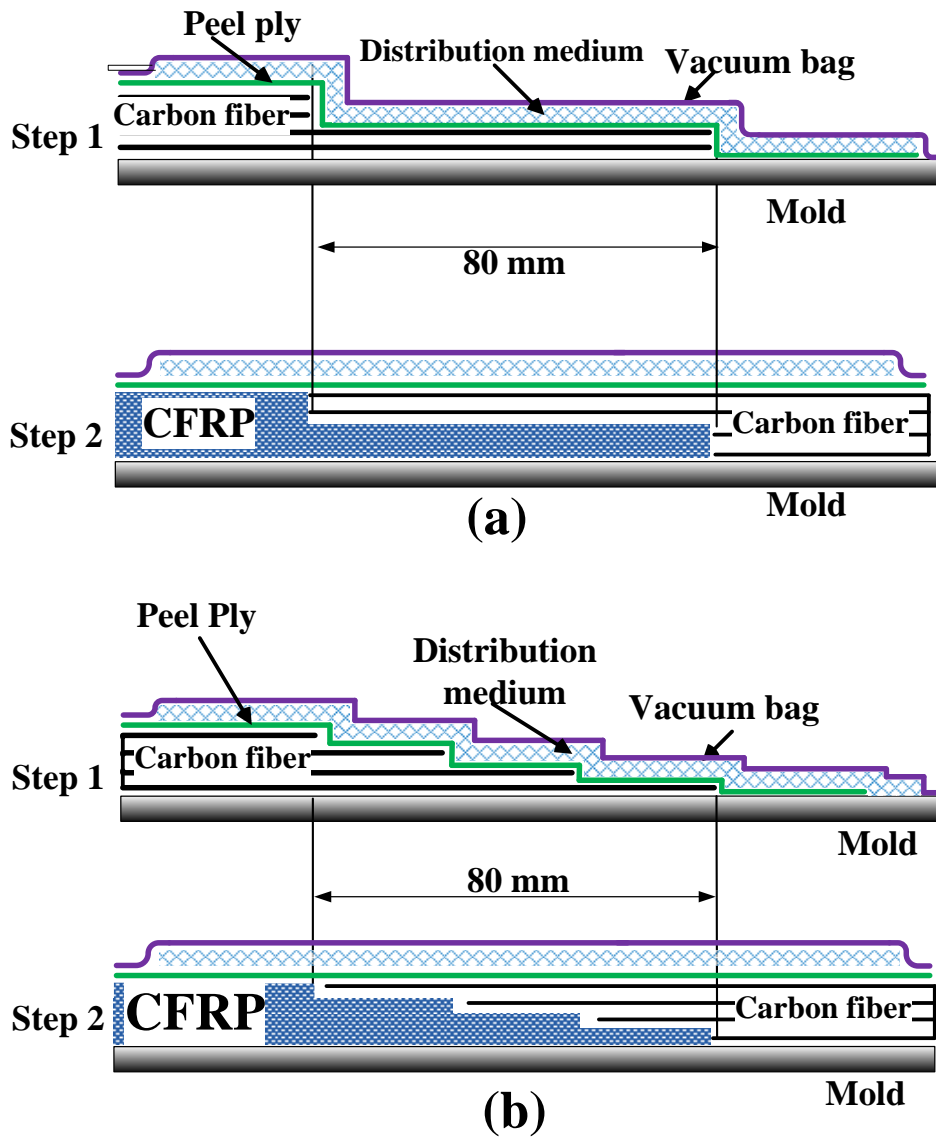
Joint group 1: (a) staircase joint-1, and (b) staircase joint-2
